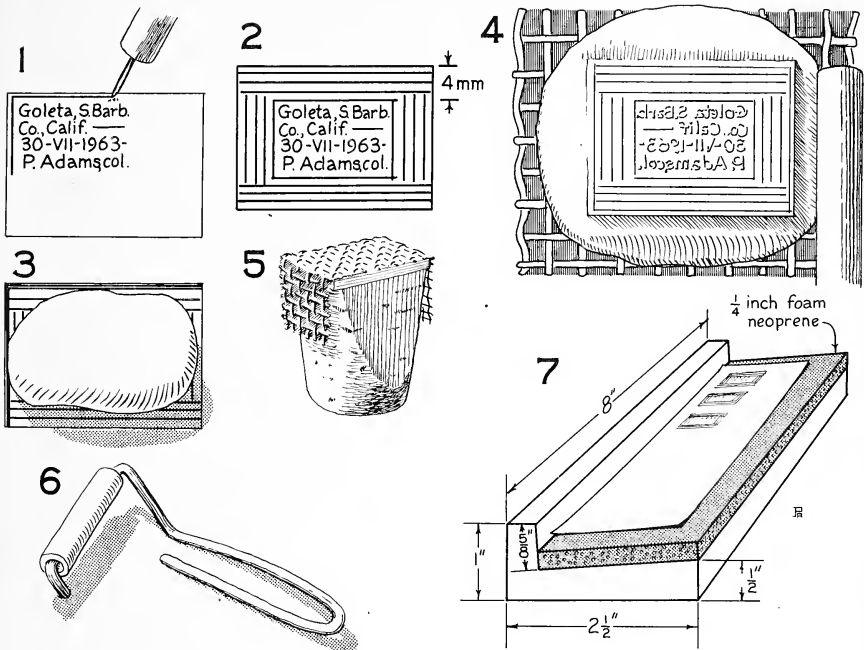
Incising the inner border around the label, using a cardboard frame as a guide. Fig. 2. The completed label mold, engraved in scratchboard. Note wide engraved border. Fig. 3. Cardboard frame and kneaded rubber pellet in position over mold. Fig. 4. The stamp, formed for forcing the rubber into the mold with the stamp handle. Edges of rubber being pressed down to prevent smudging. Fig. 5. The stamp handle. Wire gauze is held in place with a few turns of tape. Fig. 6. Brayer. Fig. 7. Printing pad with guide for aligning labels.
